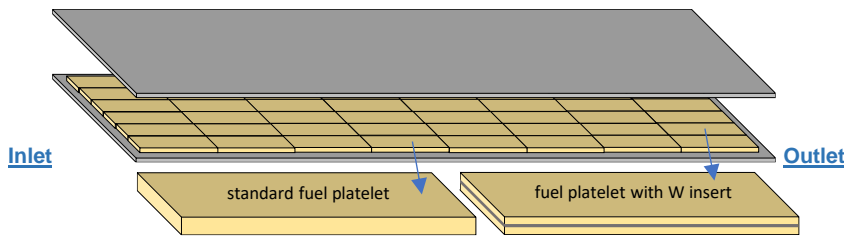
Illustration of a fuel plate with standard fuel platelets and fuel platelets containing W inserts closer to the outlet in order to minimize peak fuel temperature
